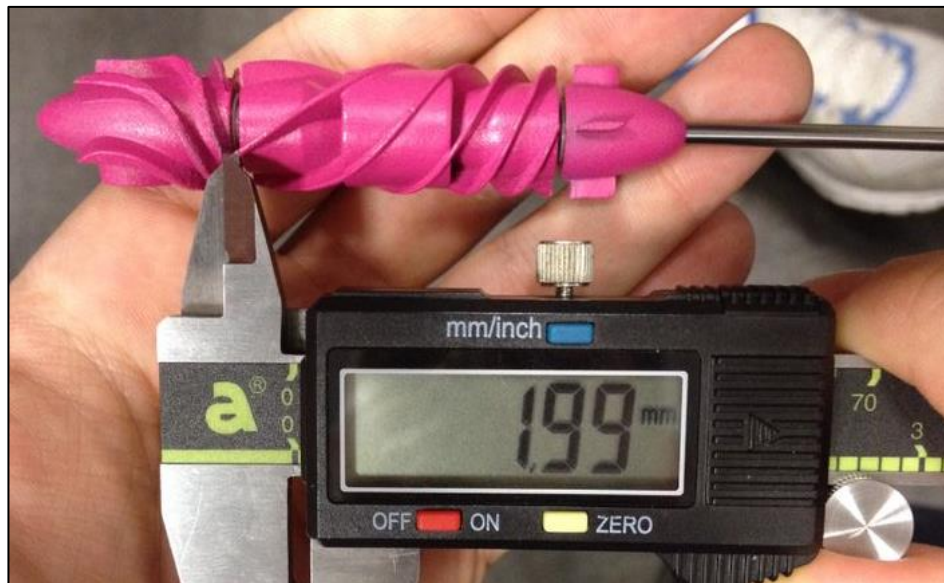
27: Final parts Inducer, Diffuser, Rotor
